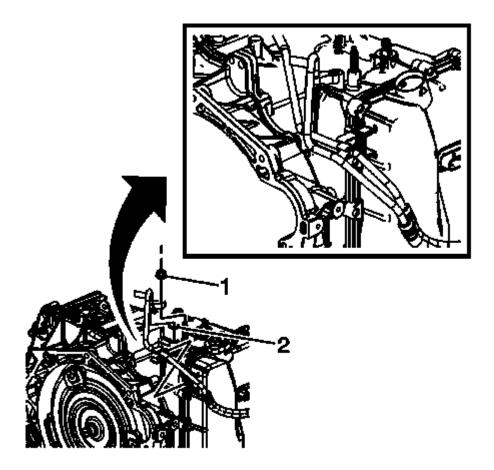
Identifying Upper Transmission And Engine Bolts Courtesy of GENERAL MOTORS COMPANY
